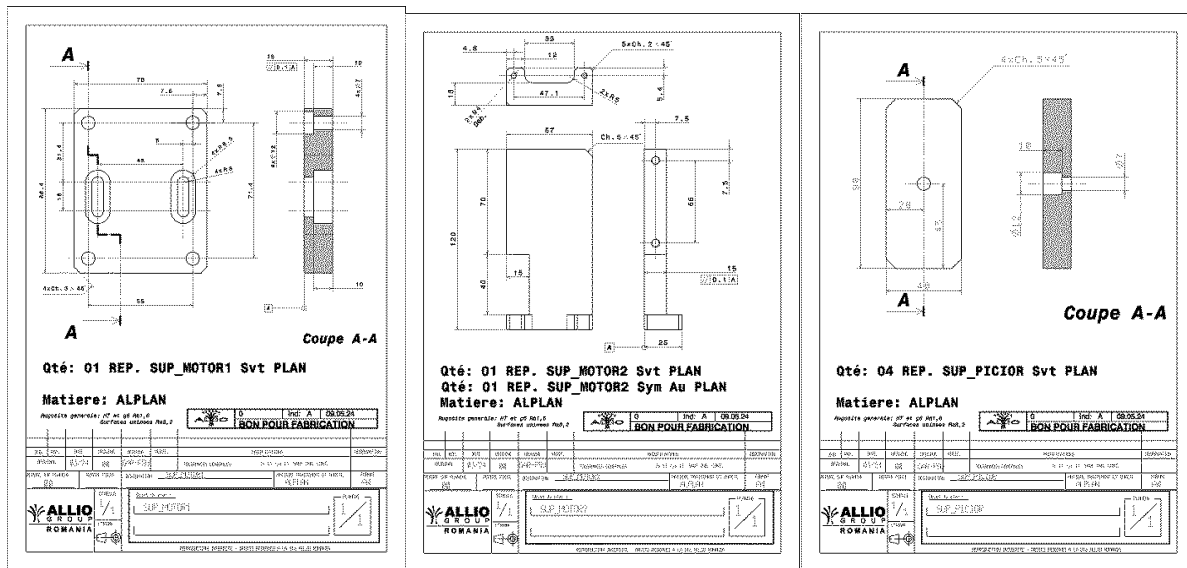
Motor mount execution drawing Figure 4.2 Main motor mount execution drawing Figure 4.3 Foot execution drawing
